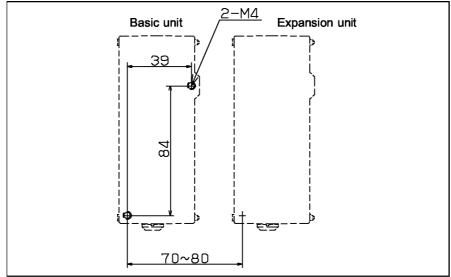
(m) Horizontal separation of mounting holes during installation
